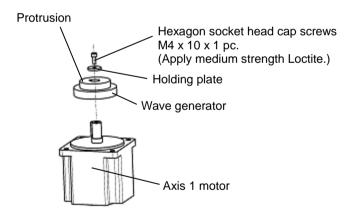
Mounting axis 1 wave generator (KHL-500, KHL-600, KHL-700)
